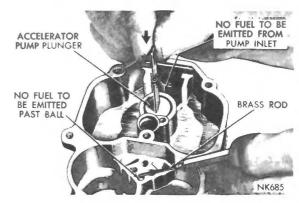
Testing Accelerator Pump Intake and Discharge Check Balls
